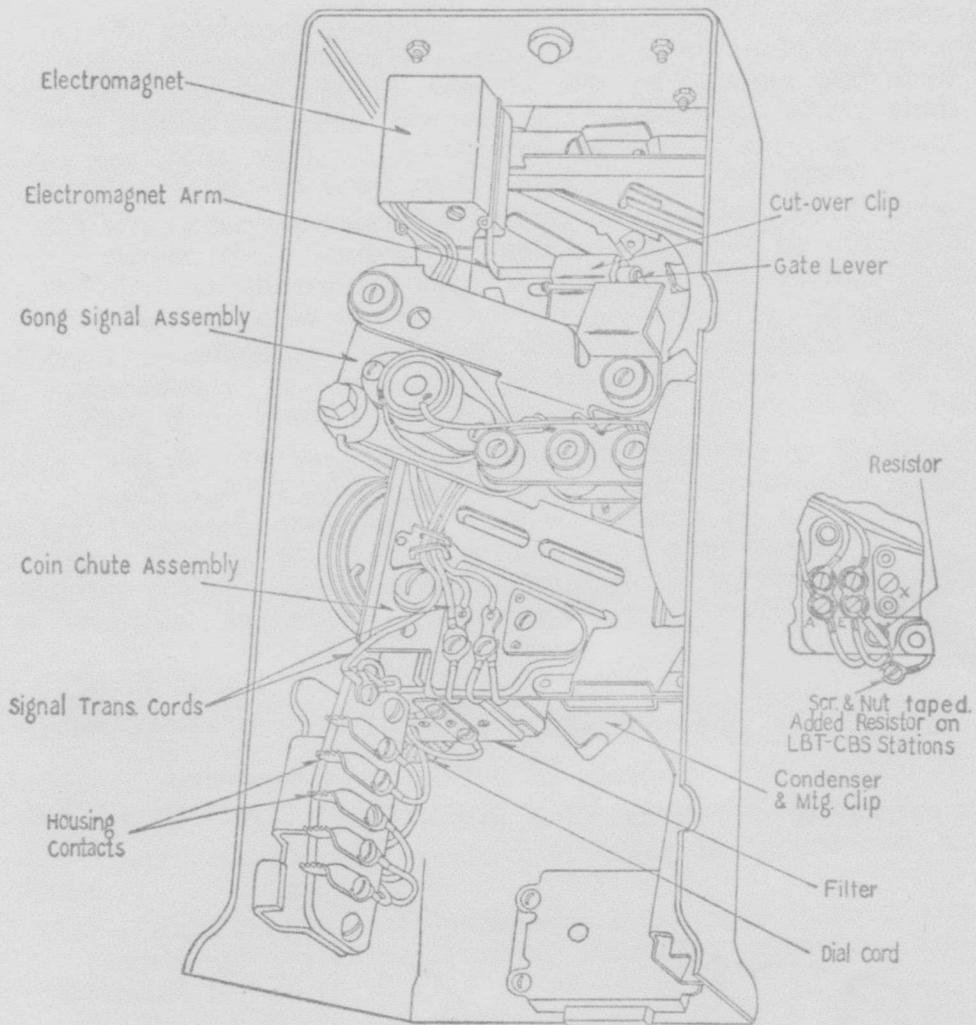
193-type Coin Collector—Upper Housing Having Chute-mounted Signal Assembly
